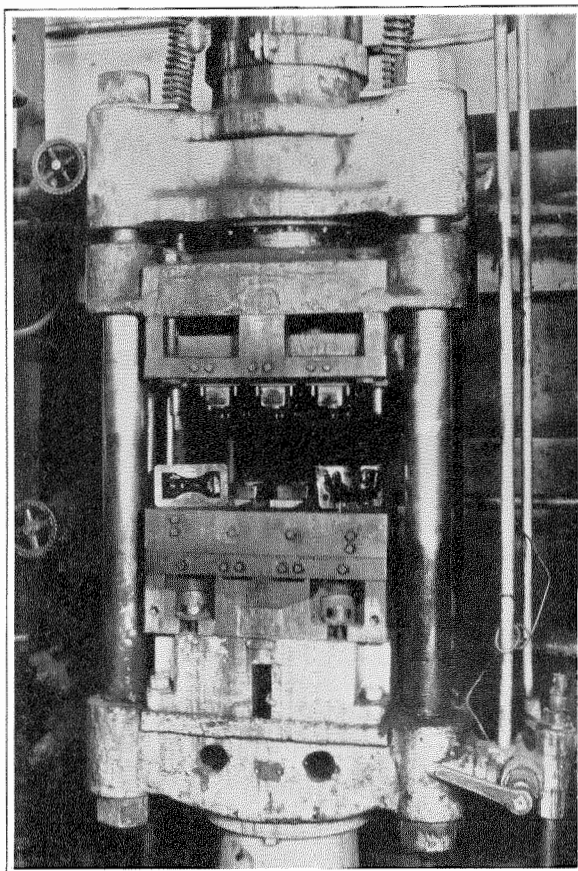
Mould for Cradle Mounted on a 50 Ton Semi-automatic Inserted Ramrod Press.
